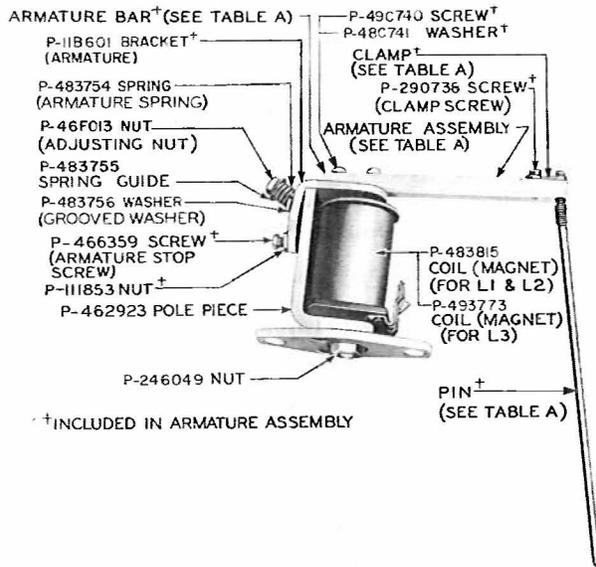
Magnet Assembly (performing unit) (see Table A)
